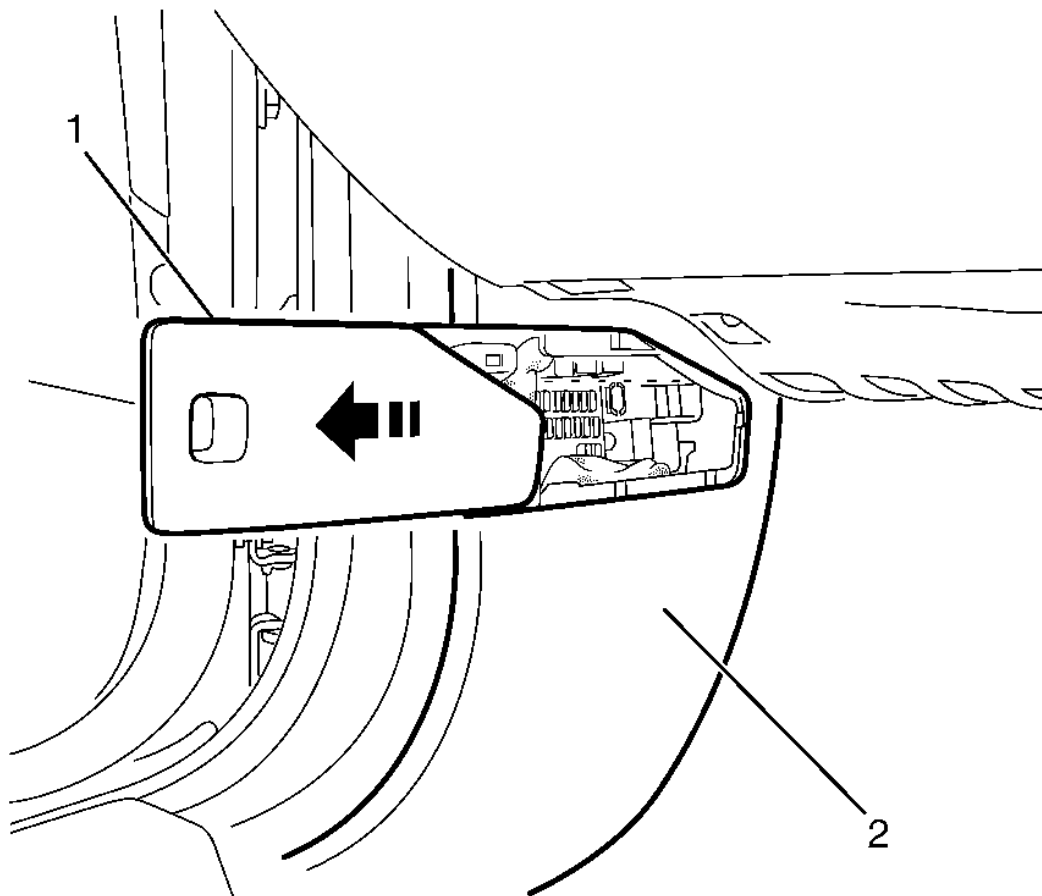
Identifying Ignition Relay & Under Hood Body Electrical Center
